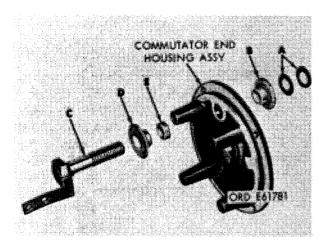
Removing or installing brush rigging jumper screw and attaching parts.
